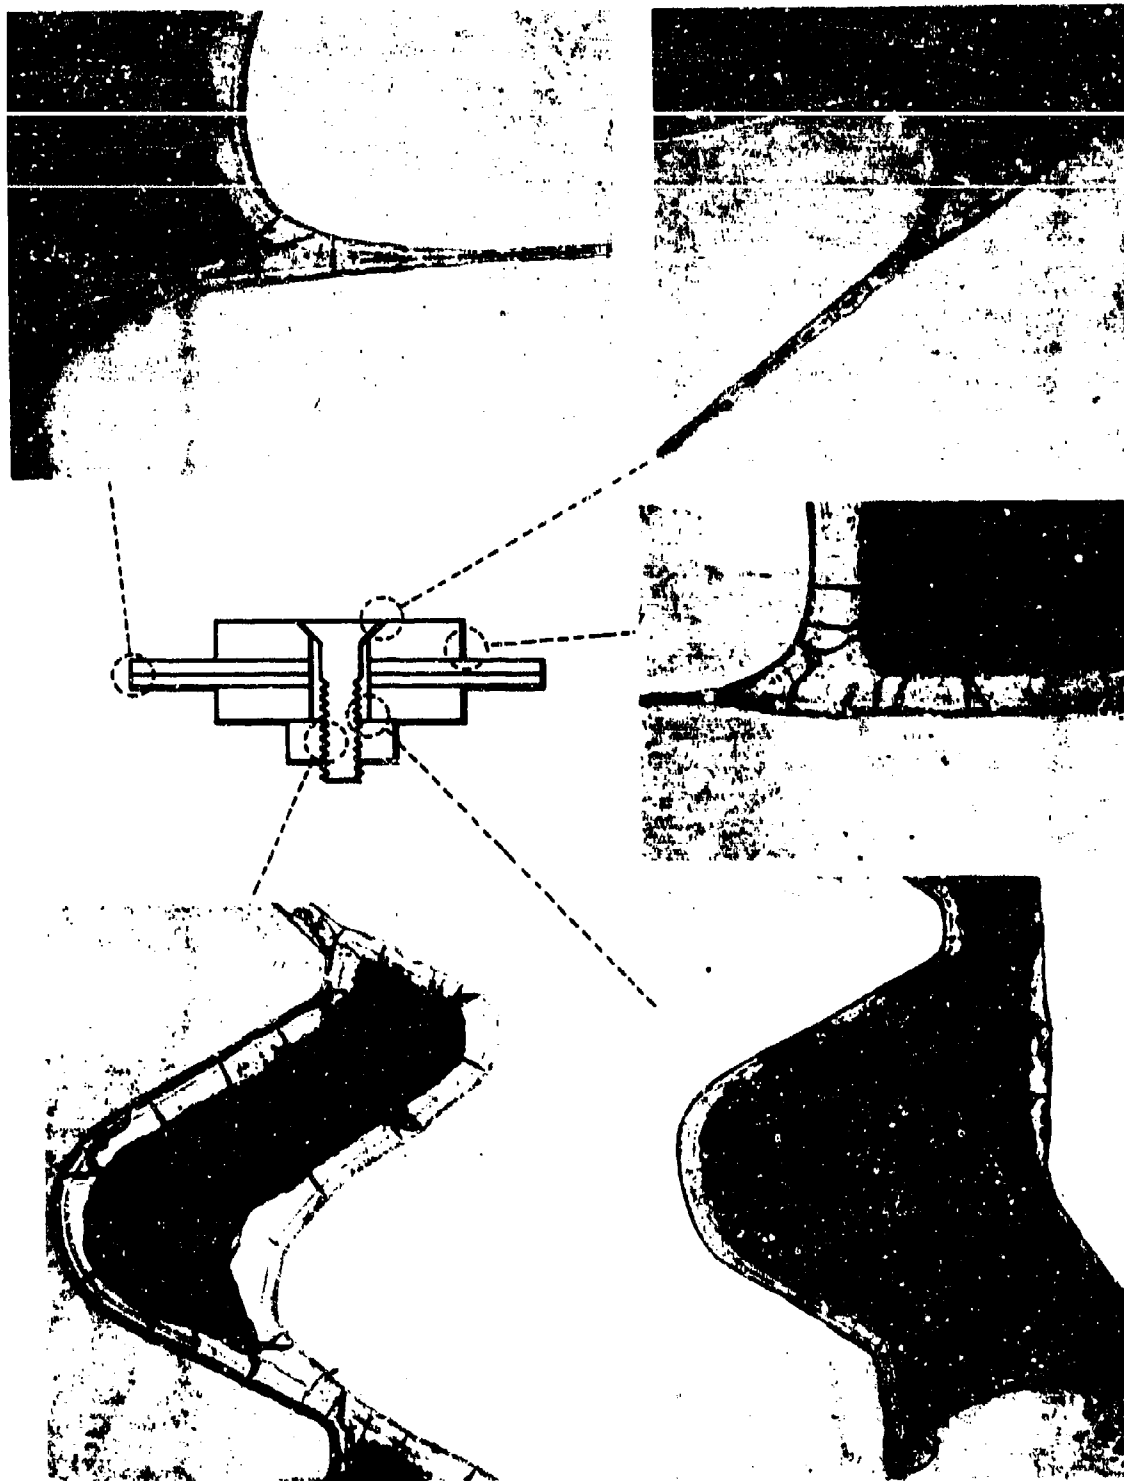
Coated and Oxidized Cb752 Flush-Head Bolted Joint (70X).
